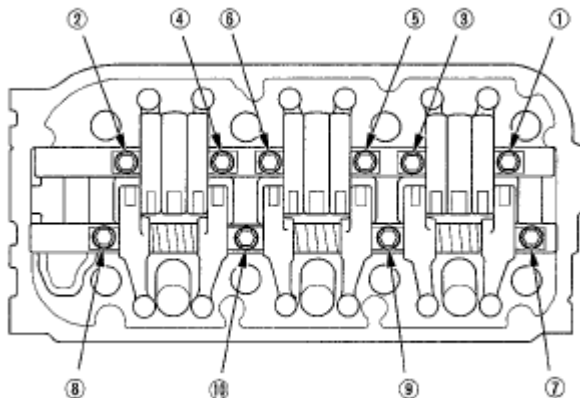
Identifying Rocker Shaft Mounting Bolts In Sequence
